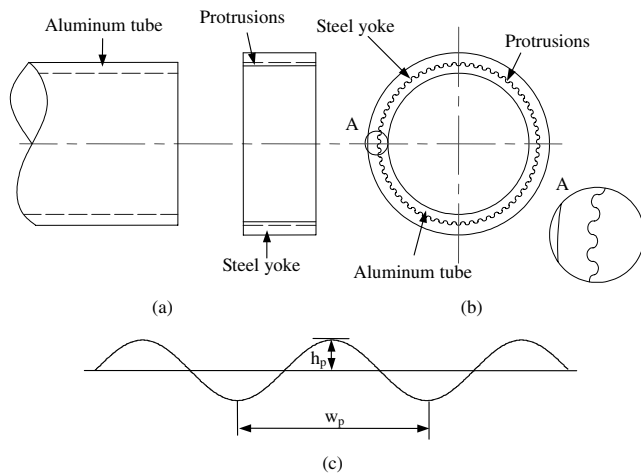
Schematic diagram of press fitted joining method: (a) disassembled parts; (b) after assembly; (c) sinusoidal shape protrusion with aspect ratio h_p/w_p .
